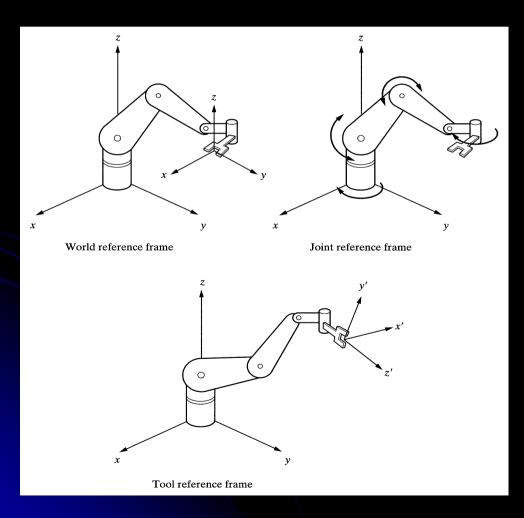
A robot's World, Joint, and Tool reference frames.
